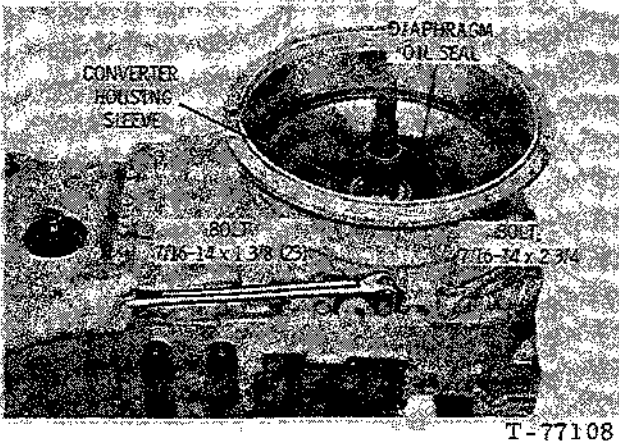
INSTALLING TORQUE CONVERTER HOUSING BOLTS
